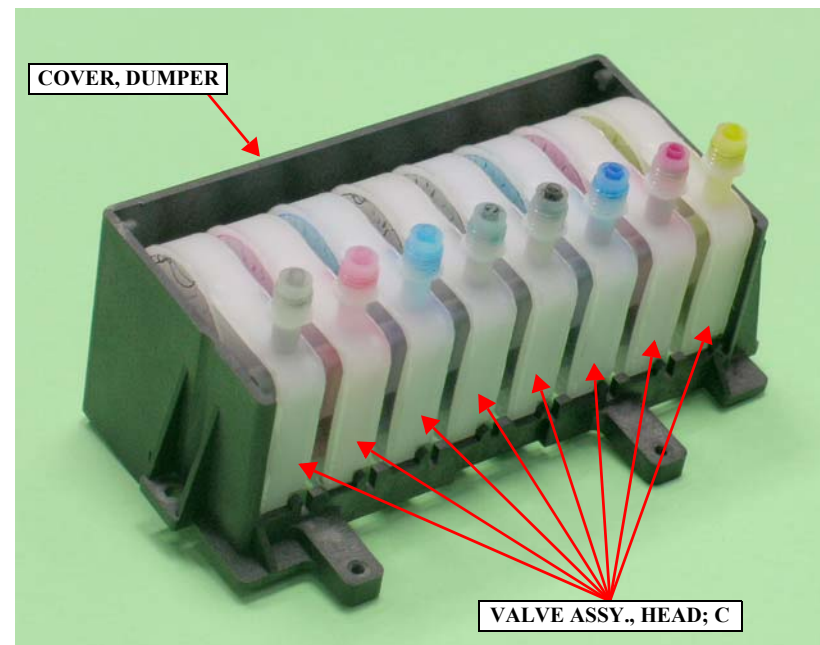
Removing the VALVE ASSY., HEAD; C
